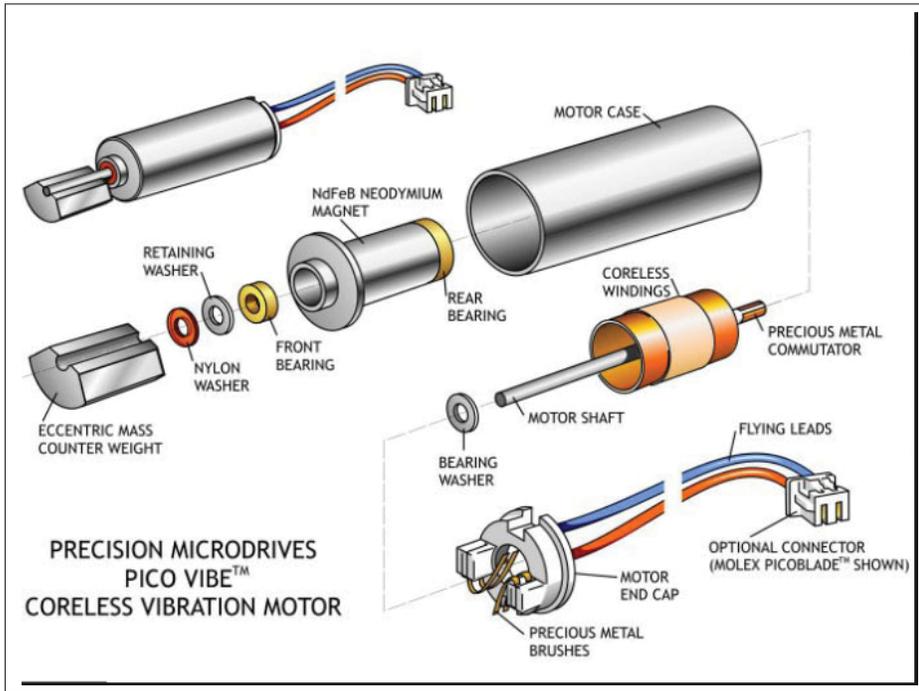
An exploded view of Eccentric rotating mass (ERM) motor¹
